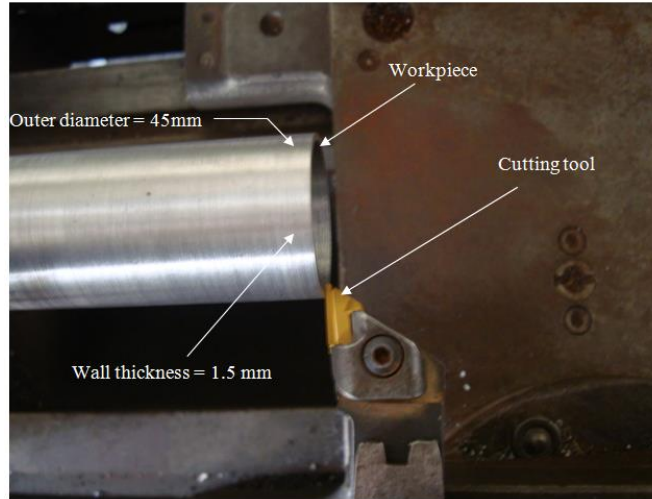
Photograph of the turning machine, showing the workpiece and tool used.
